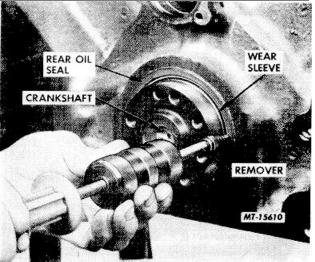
Removing Rear Main Bearing Cap Oil Seal Using SE-2091 Seal Remover
